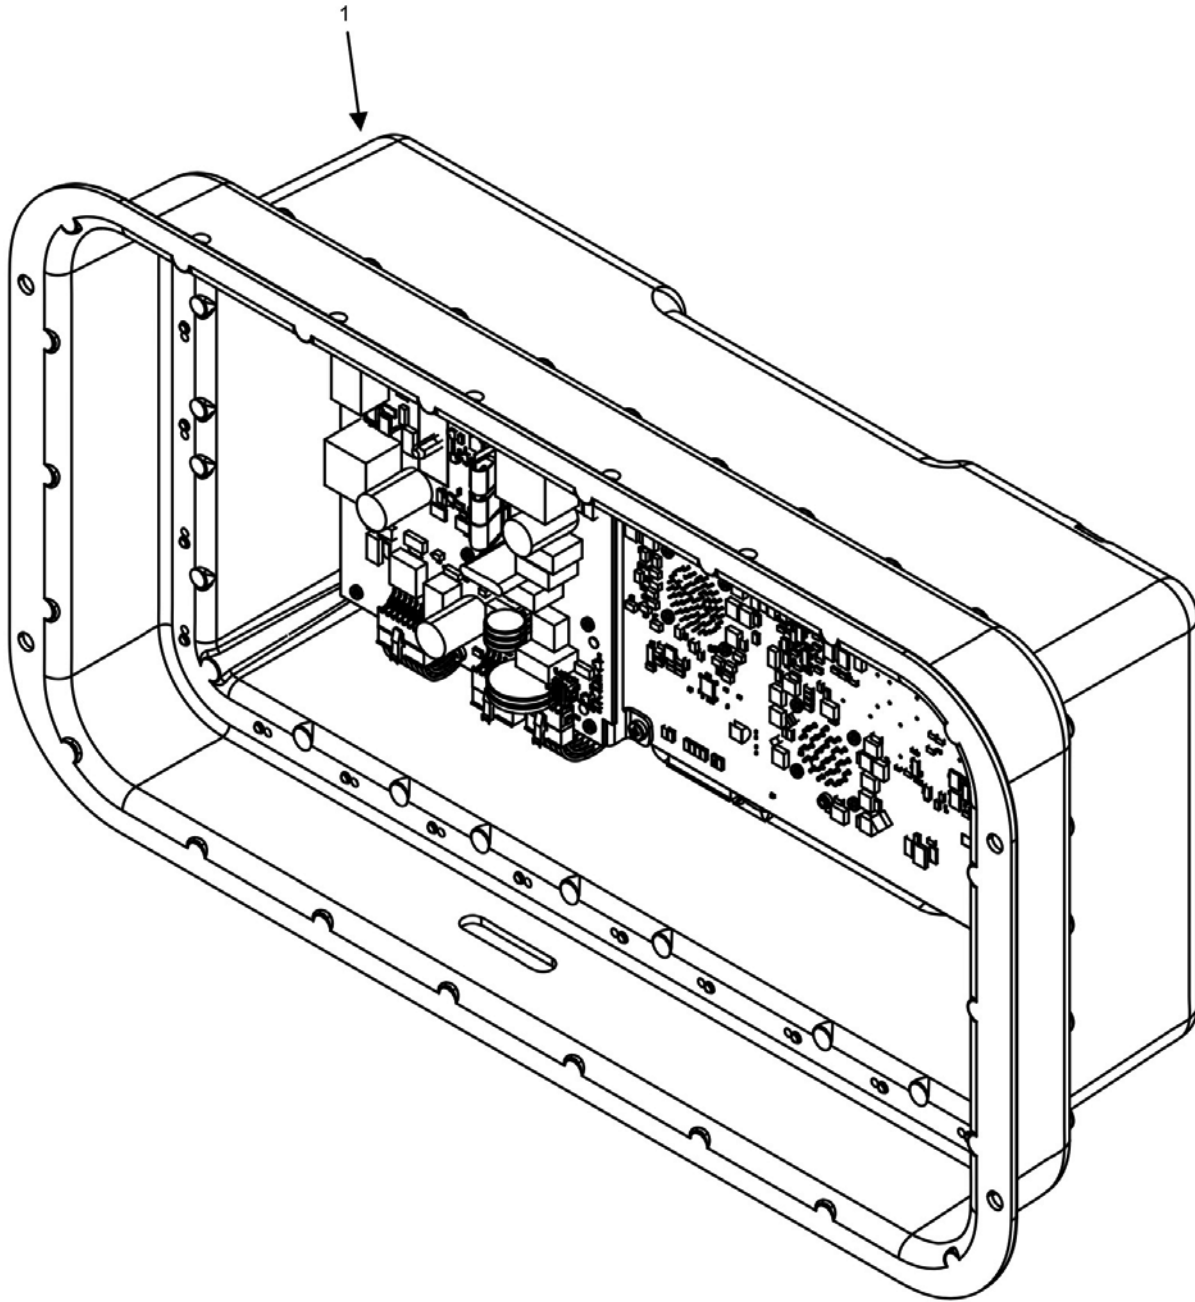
DCS Enclosure Assembly (Sheet 1 of 3).
